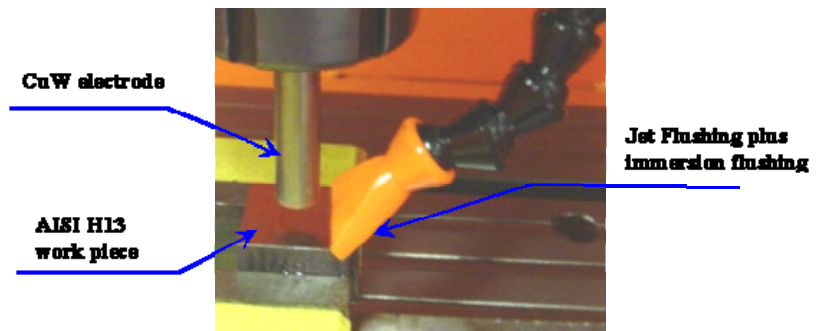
Assembly used to determine the adequate parameter settings for finish EDMachining: a cylindrical CuW electrode, the workpiece sample AISI H13 and the flushing method; mounted on a Charmilles ROBOFORM 30 CNC machine-tool. A hydrocarbon with 3 cSt at 400 C was used as dielectric fluid.
